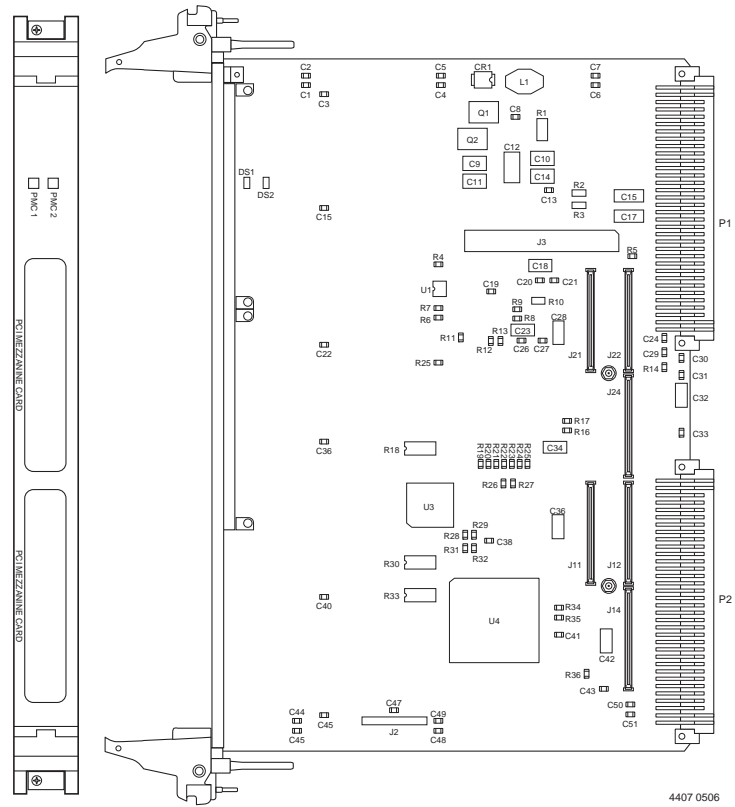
PMCspan16E-002 Component Layout and Front Panel
